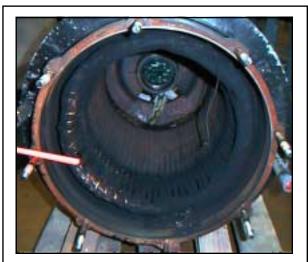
Overall discoloration of the stator winding—usually indicates excessive temperature. Check load, power supply and cooling.
